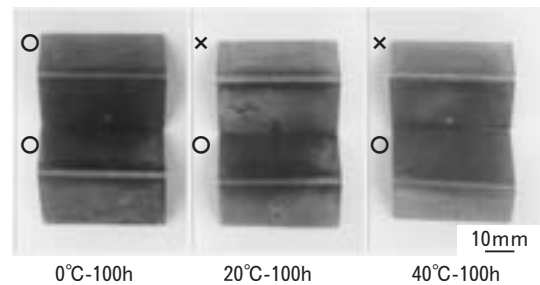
Appearance of the specimens after bending tests. Upper samples were bent before reversion and lower ones were bent after reversion¹⁰⁾.
